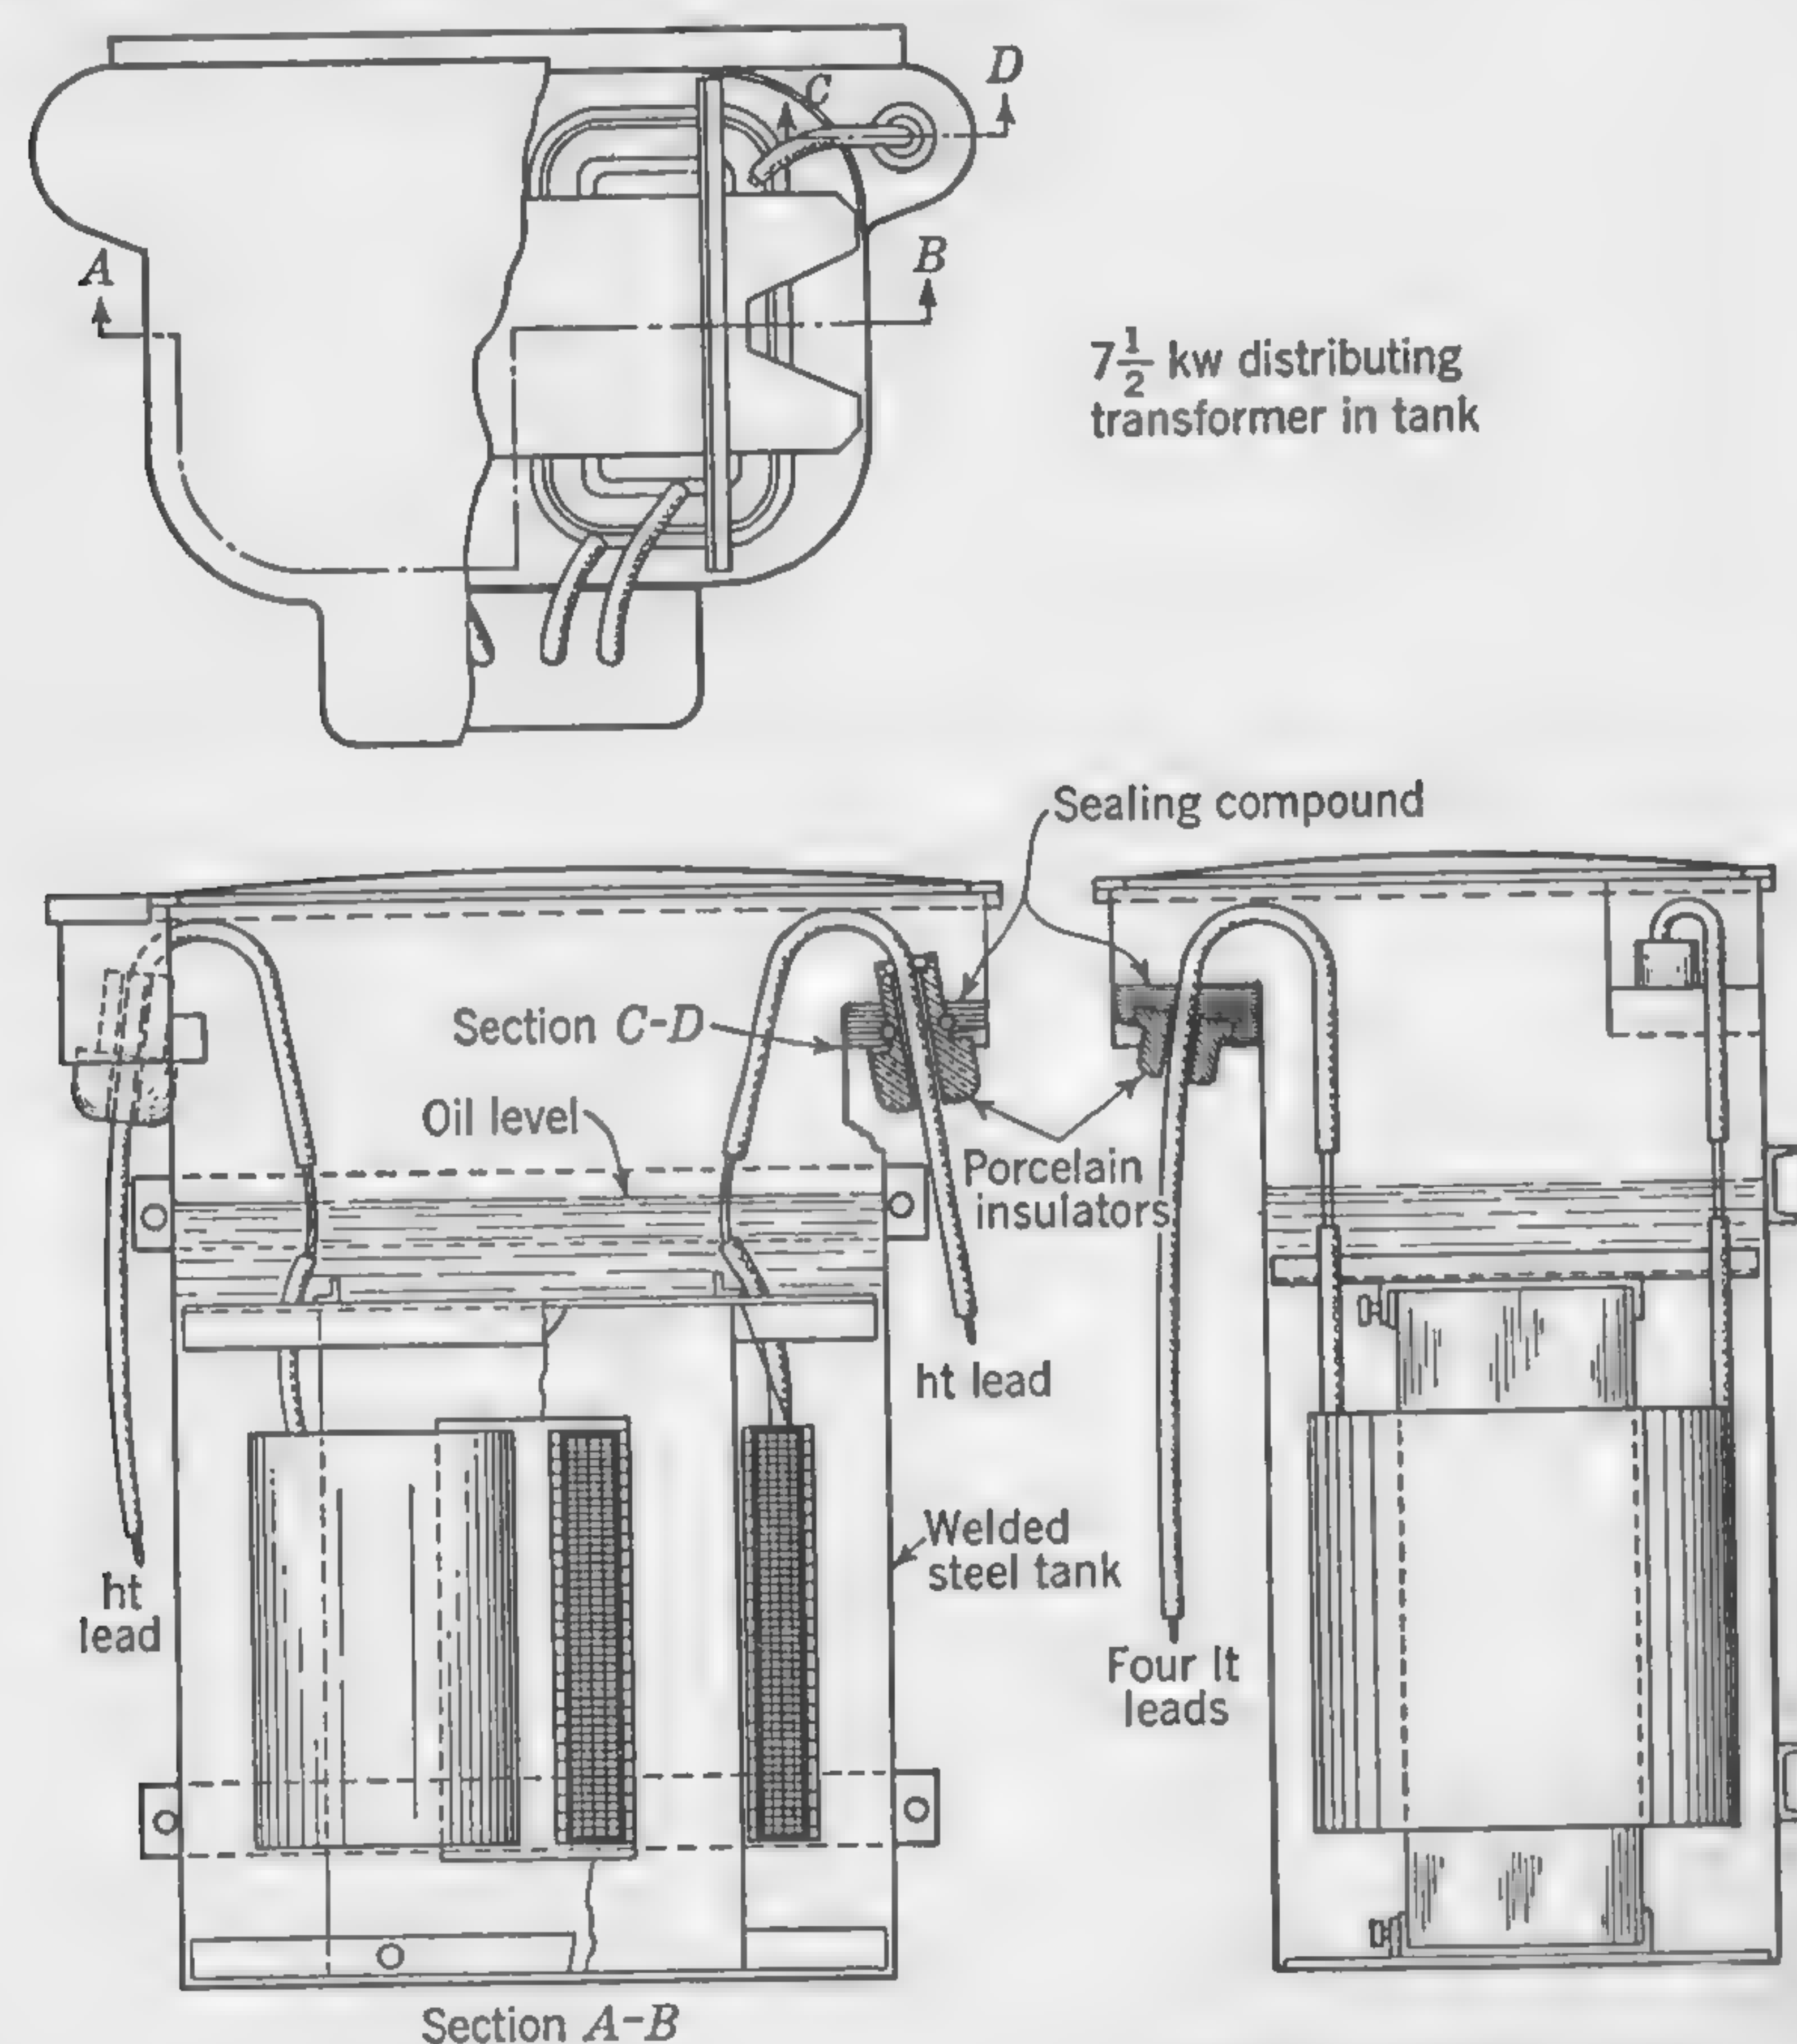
Small core-type transformer in welded sheet-iron tank.
